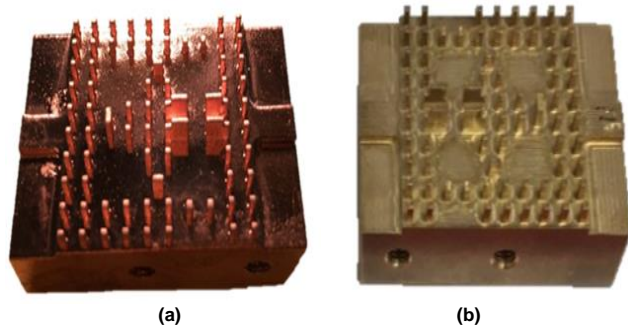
Prototype Ka-band BPFs: (a) Polyjet 3-D printed (weighing 17 g); and (b) CNC machined (weighing 112 g).
